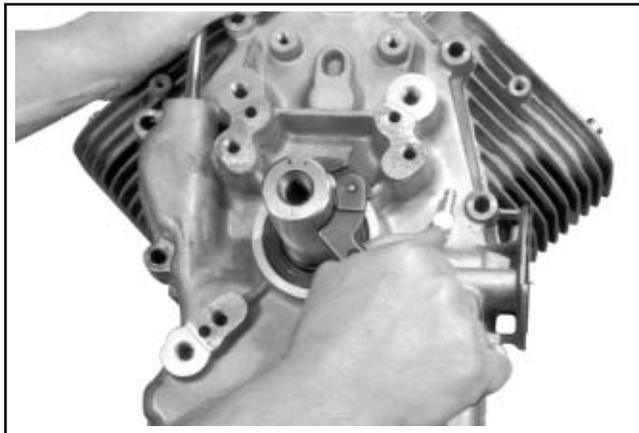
Using Spanner Wrench to Turn Crankshaft.
